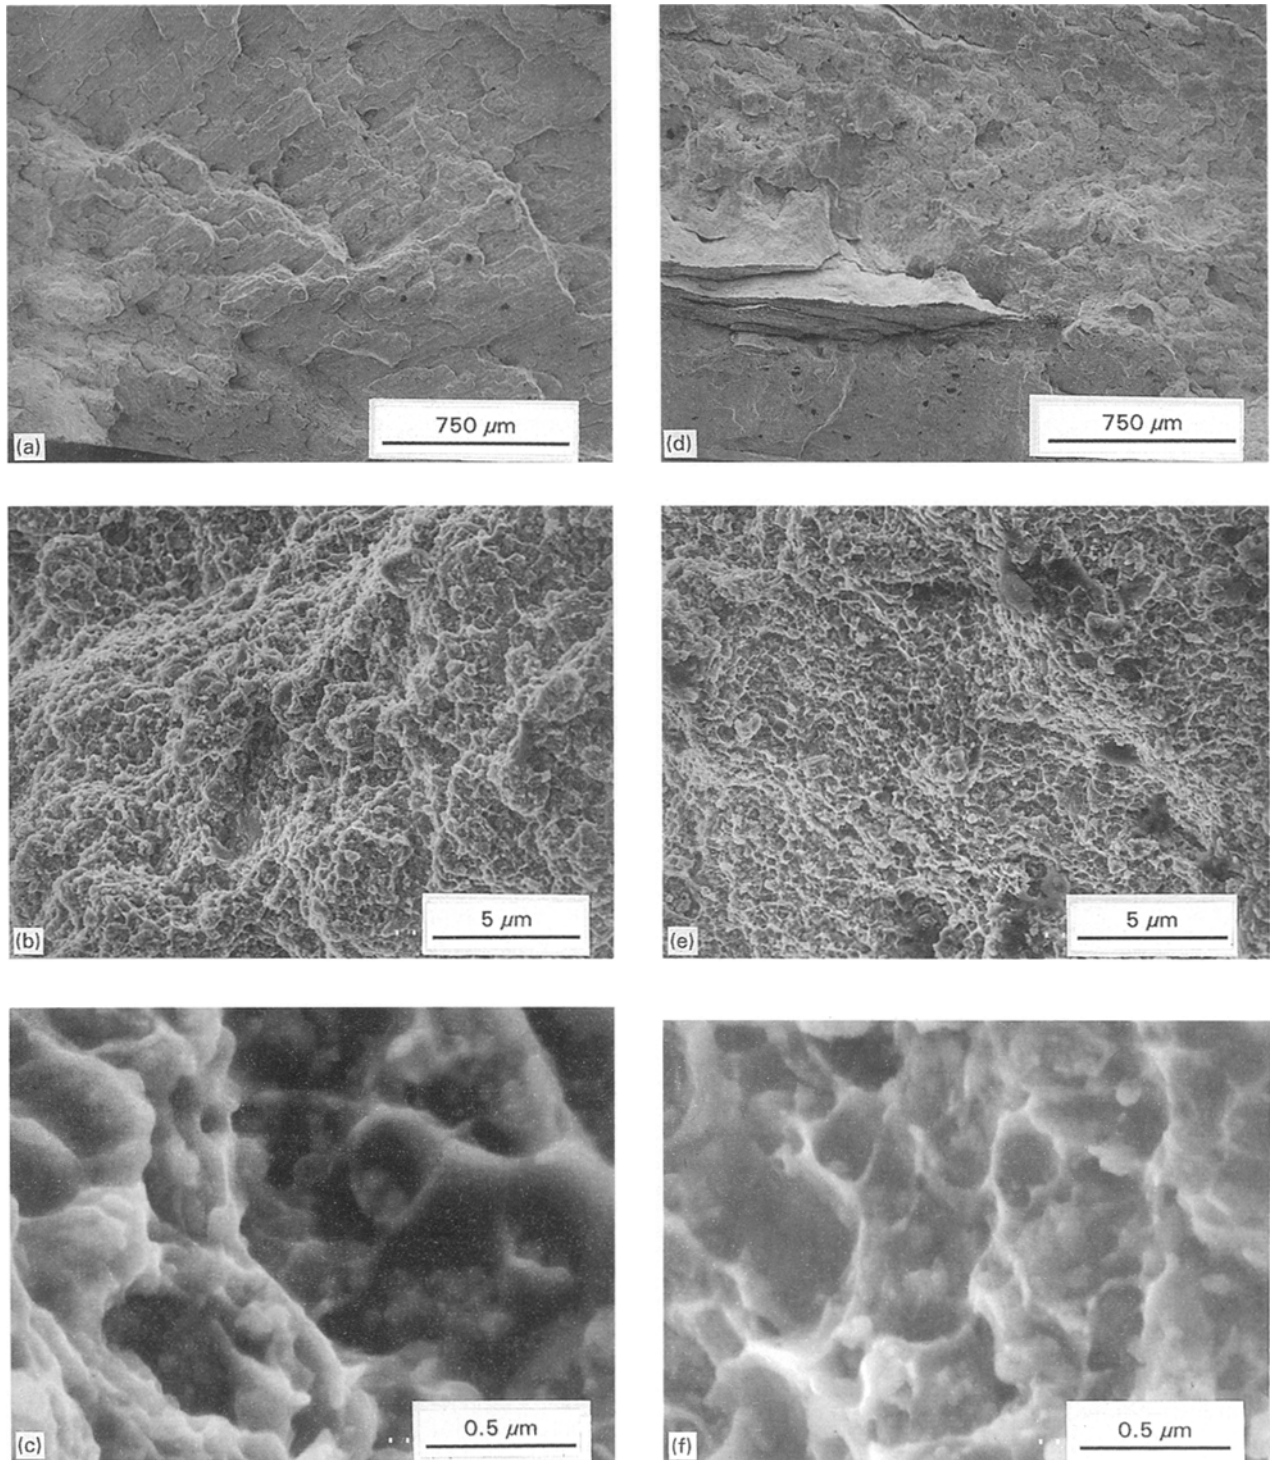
SEM fractographs of tensile specimens: (a–c) HAF weld; (d–f) base material.
